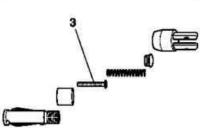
Preparation of a special tool for removing valve springs: 1 - head support, 2 - stem bearing 3 - hard part
